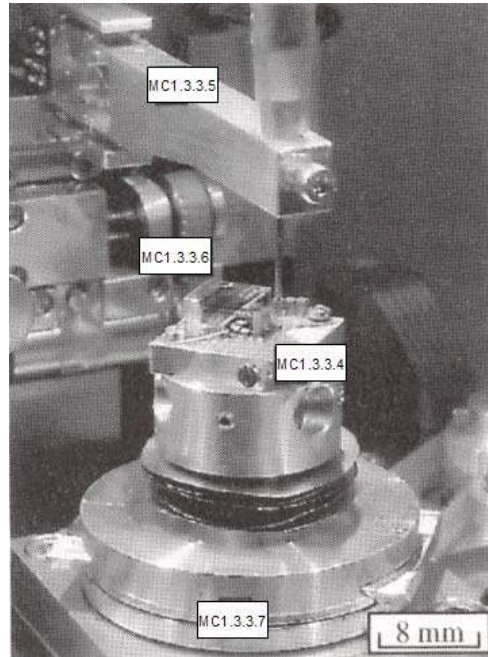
A part of the micro-assembly manipulator, adapted from Bexell (1998)
